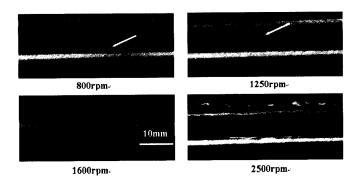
Top surfaces of FSW joint at each tool rotating speed
